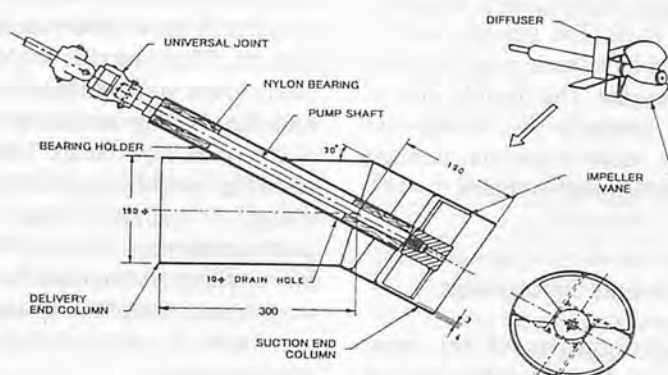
Universal Jointed Propeller Shaft for Axial Flow Pump.
